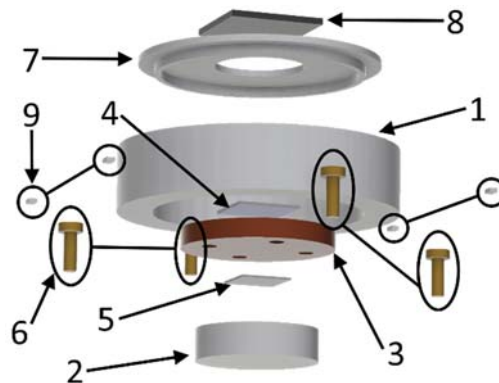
CAD exploded view of the whole detection system. Starting from the bottom, we included aluminum cold finger (2), PTFE thermal coupler (5), aluminum device support (3), MgO + YBCO bolometer (4), cryostat enclosure (1) and cover with high resistivity silicon optical window (7-8), screws (6) and SMD resistors (9).
